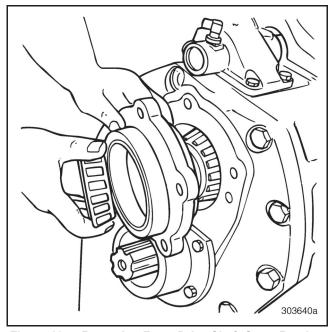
Removing Front-Drive Shaft Outer Bearing Cone and Bearing Retainer
